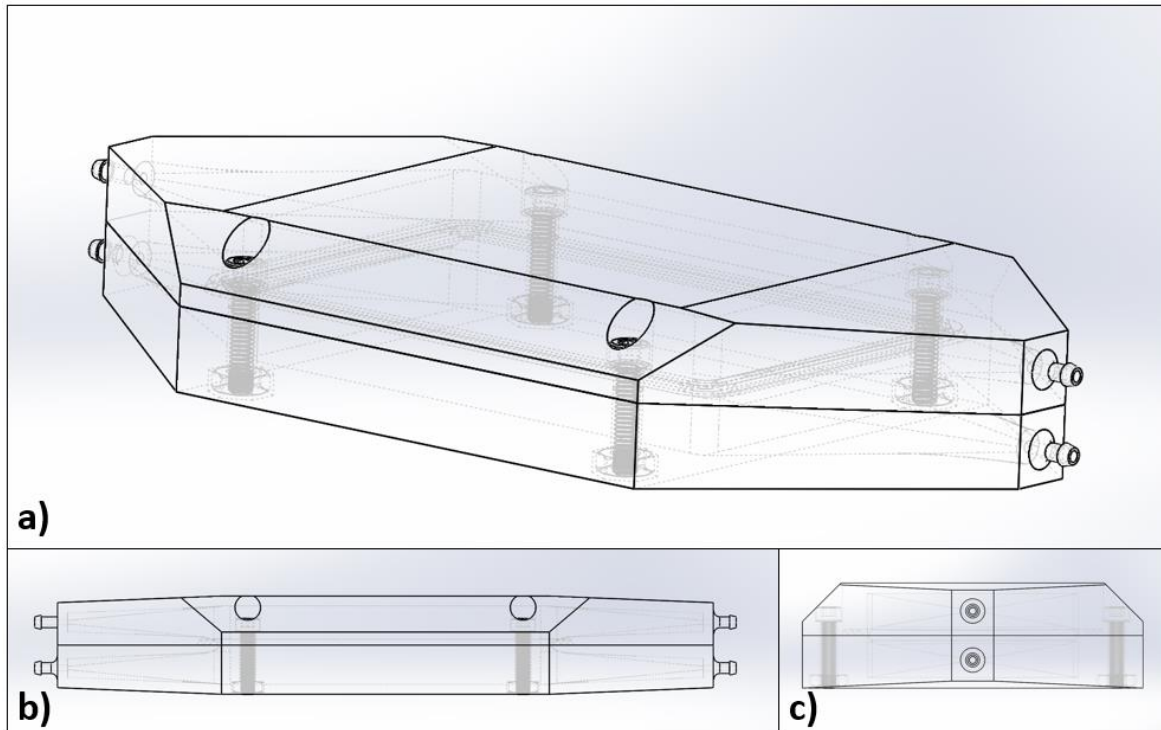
Memboxx 3.0 a) isometric view, b) side view, and c) front view.
